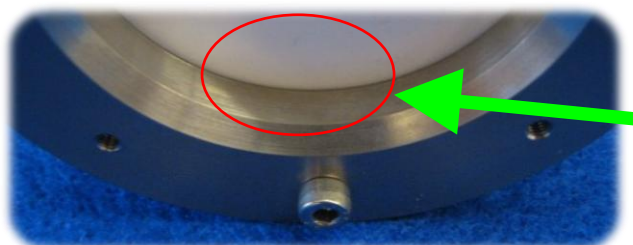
Make a final inspection at the front face to check if the O-ring or membrane is not over-pressed or damaged. There should be always a small gap of ~0.2 mm between the retainer flange and the membrane.
